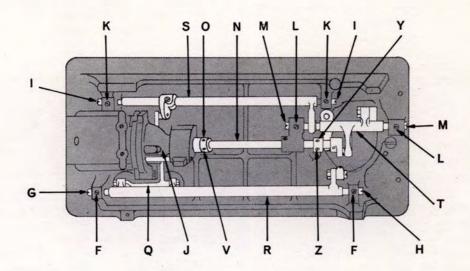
Setting Feed Dog Sidewise and Adjusting for End Play or Binding.
